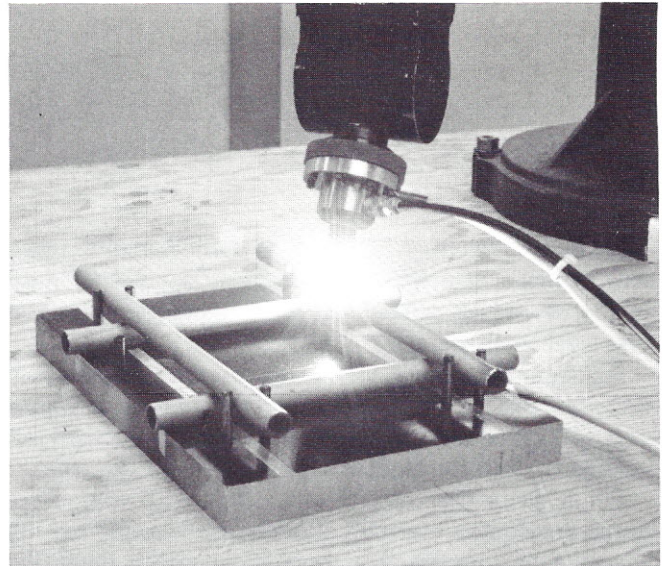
A PUMA arm moves the tungsten electrode ("TIG torch") over the workpiece. The controller makes sure it follows the shape of the part. The NIKA POWER 100 programmable power supply controls the weld parameters.
